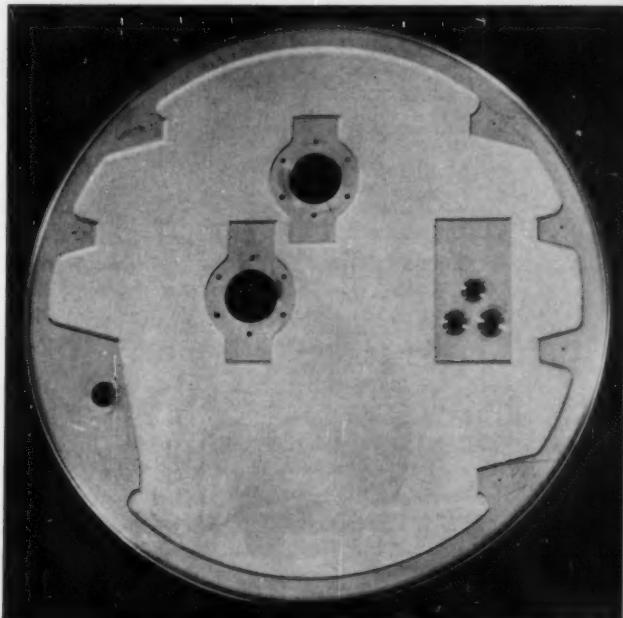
Right — Fuel tank bulkhead is chemically milled from 0.320-in. aluminum sheet to avoid fasteners and sealing problems associated with built-up bulkheads of sheet metal with stiffeners. Depth of cut is 0.260-in., leaving 0.060-in. web. Holes and peripheral cuts are machined after chemical milling.
